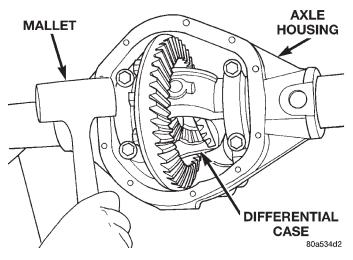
Seat Pinion Gear Dummy Side Bearing
